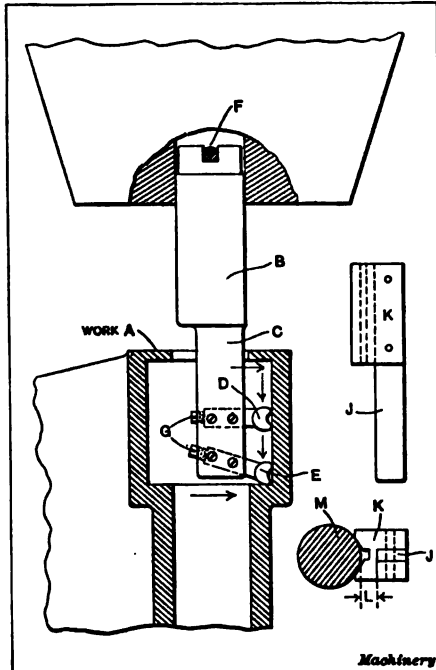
Bar for Undercutting, Facing and Boring in the Vertical Turret Lathe and Gage used in Setting Tools
